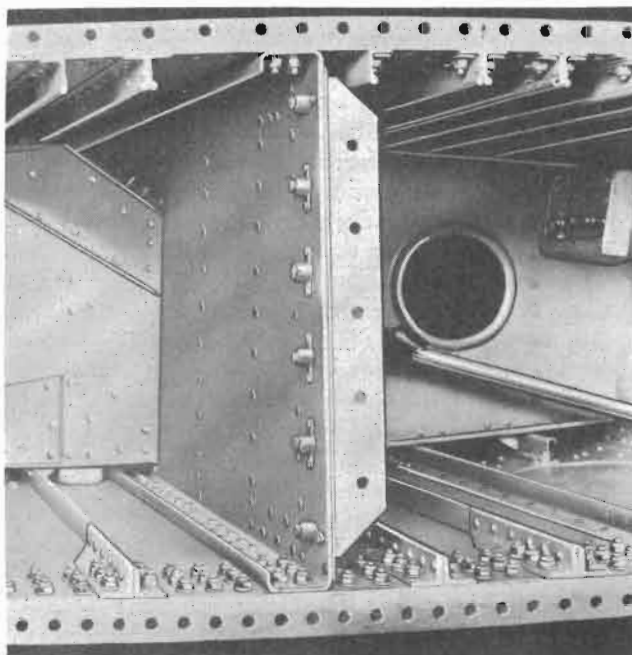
Wing Joint Bolting Angle Cover Attachment
